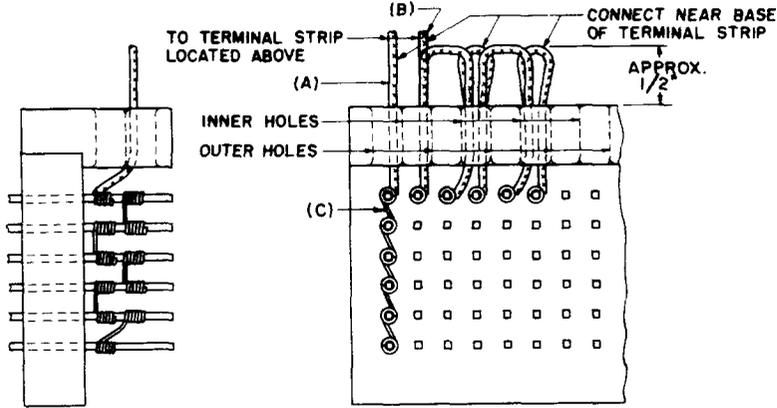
Cross-Connections – 251-, 252-, and Similar-Type Terminal Strips
